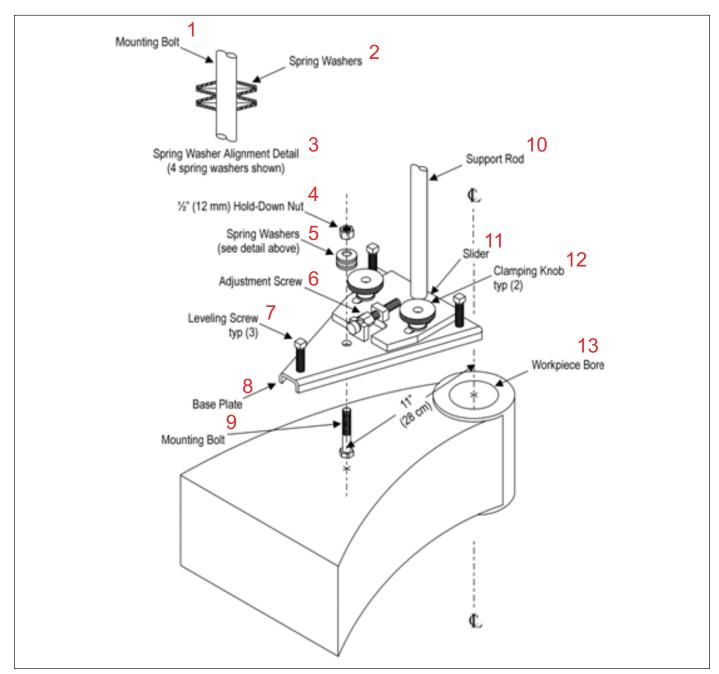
ASSEMBLY ON THE ADJUSTABLE BASE
